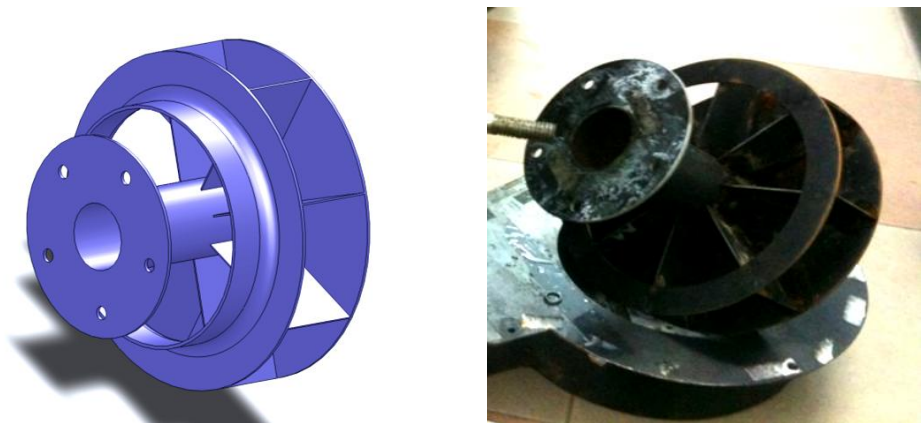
Axial-flow impeller with single outlet housing diffuser
